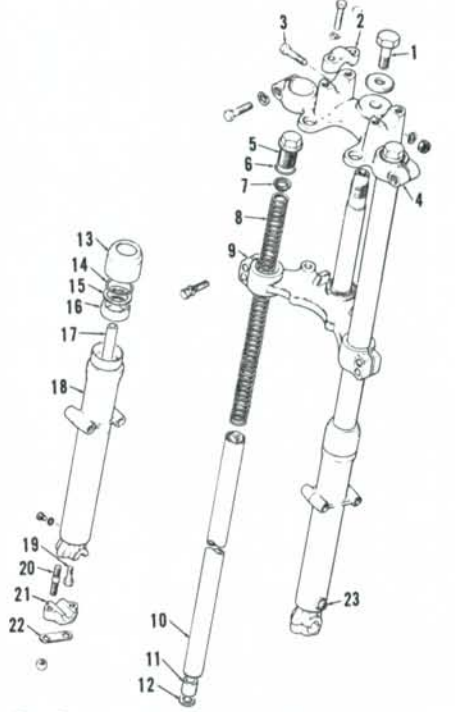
Exploded view of front suspension units used on TM 250 models.
